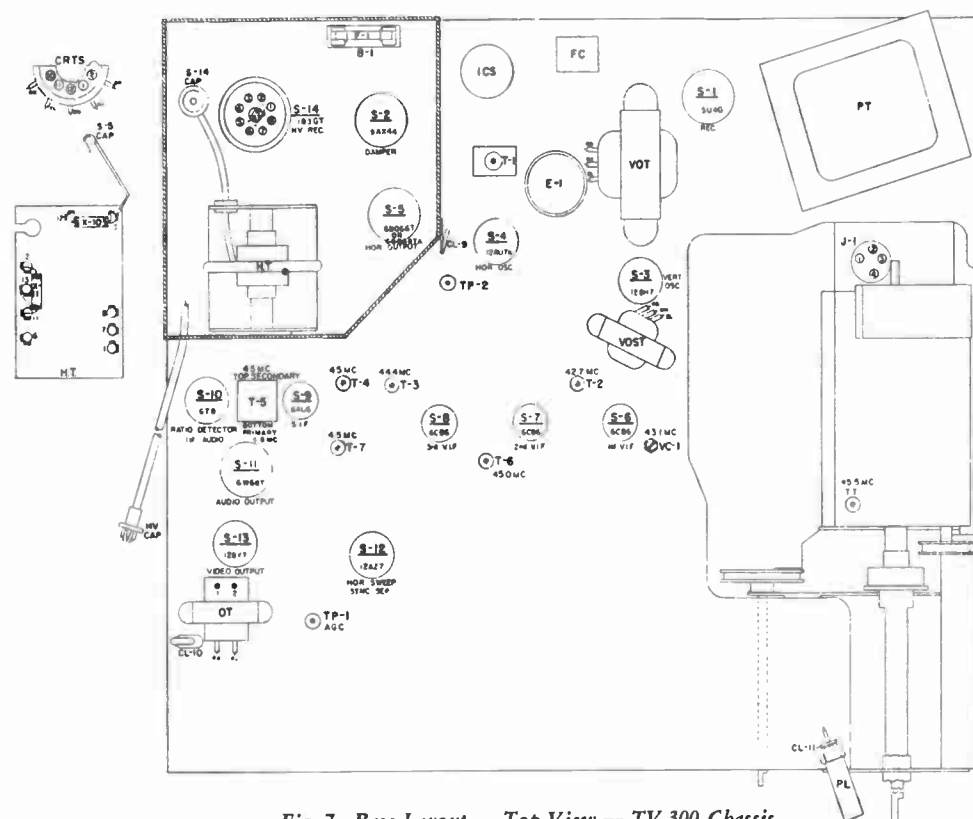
Base Layout — Top View — TV-300 Chassis.
